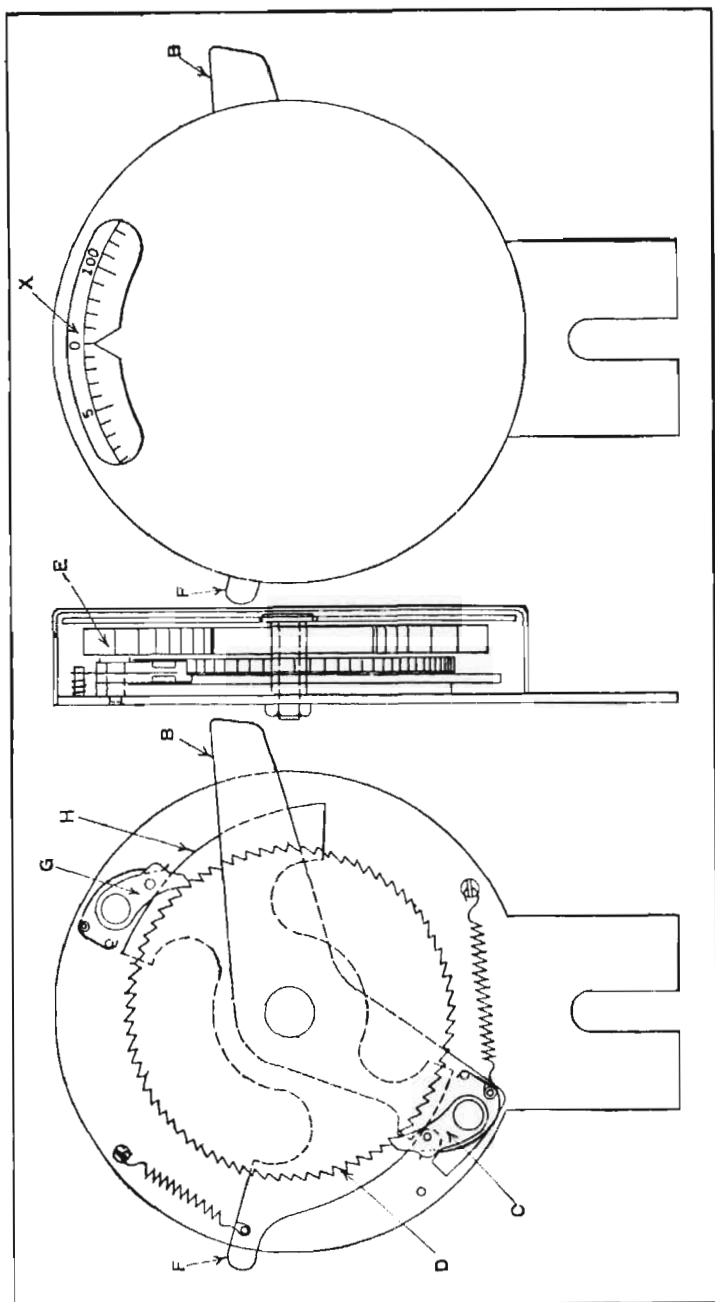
Counter with Rapid-return Mechanism, Used on Type-setting Machine
